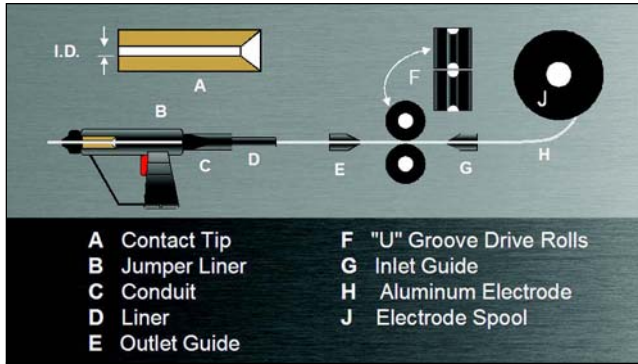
Wire Feeding System for Gas Metal Arc Welding of Aluminum
